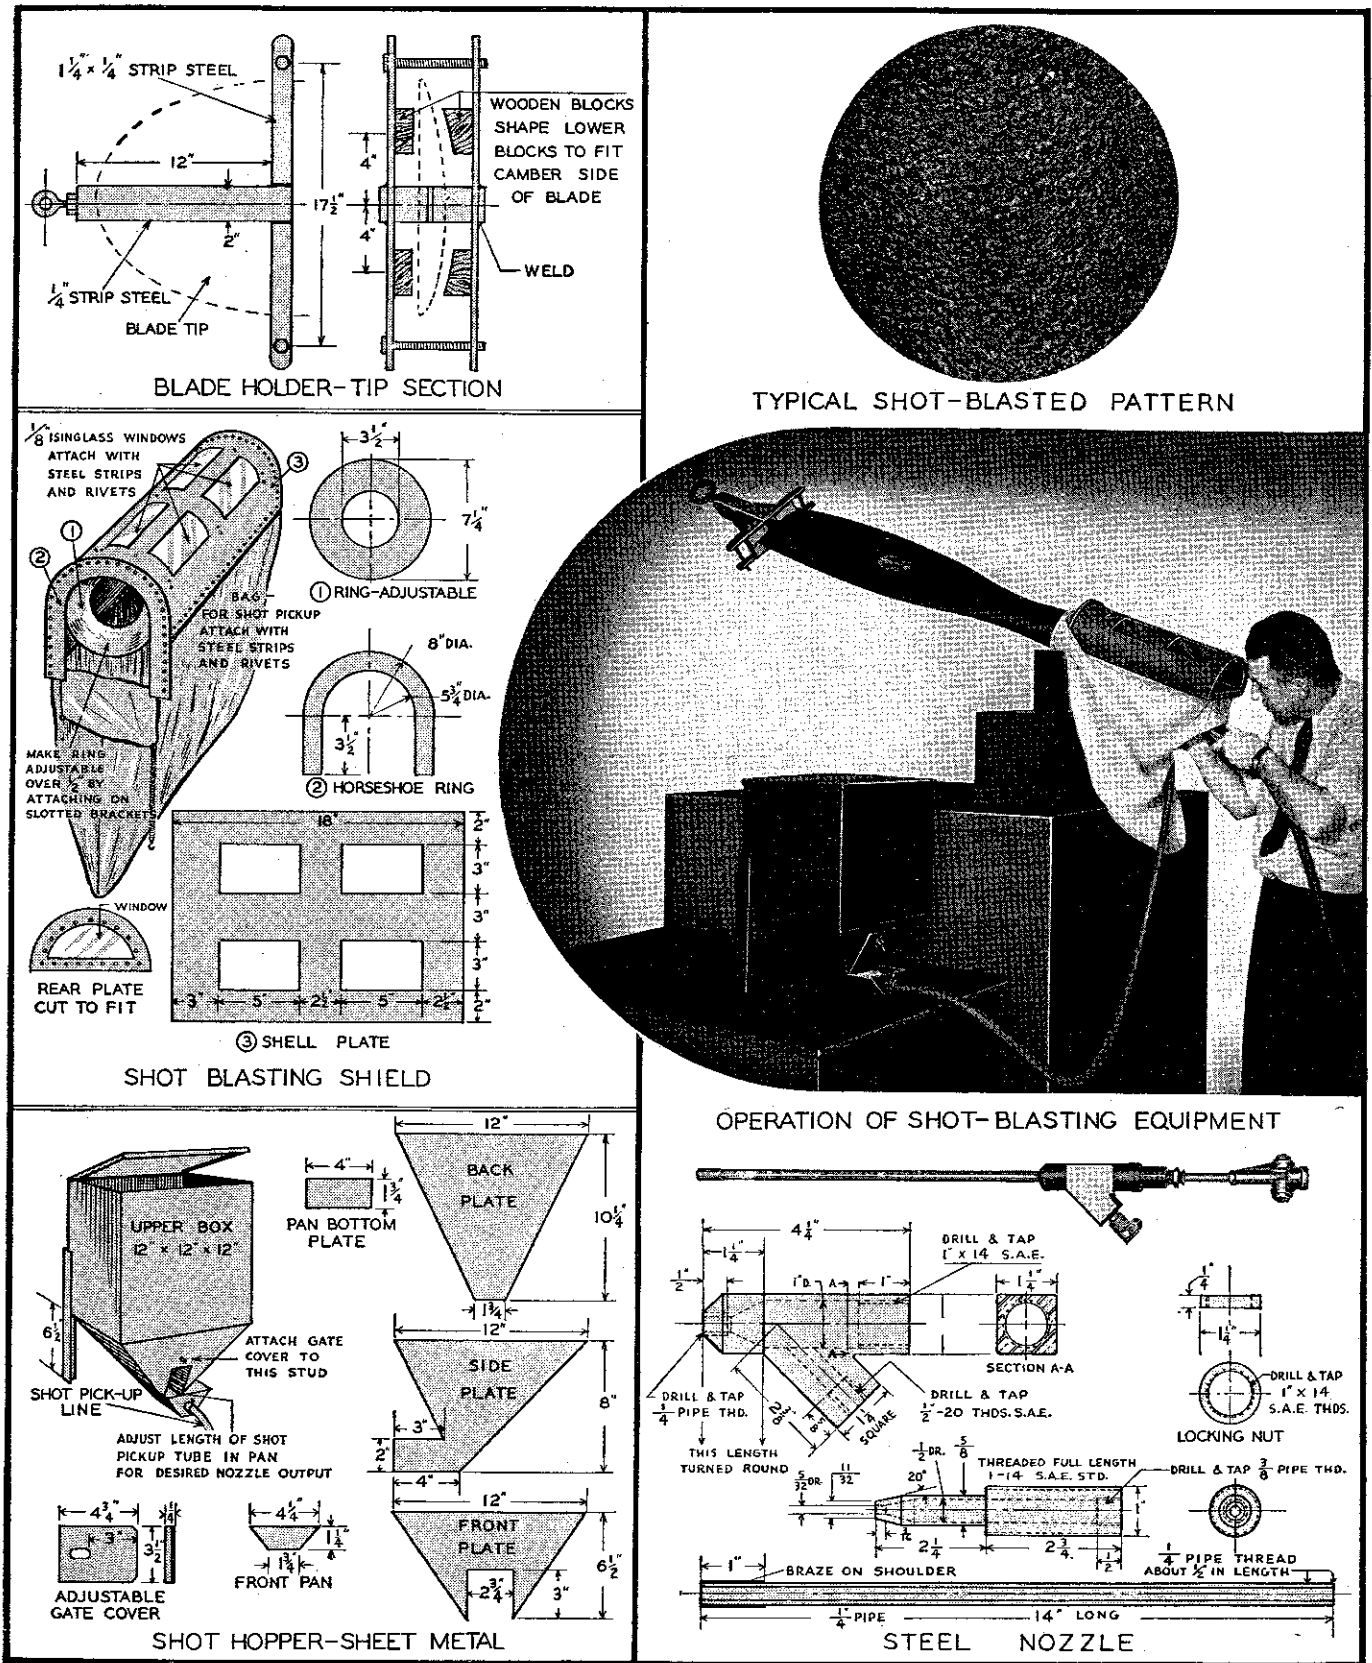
Hard Alloy Blade Shot-Blasting Equipment
